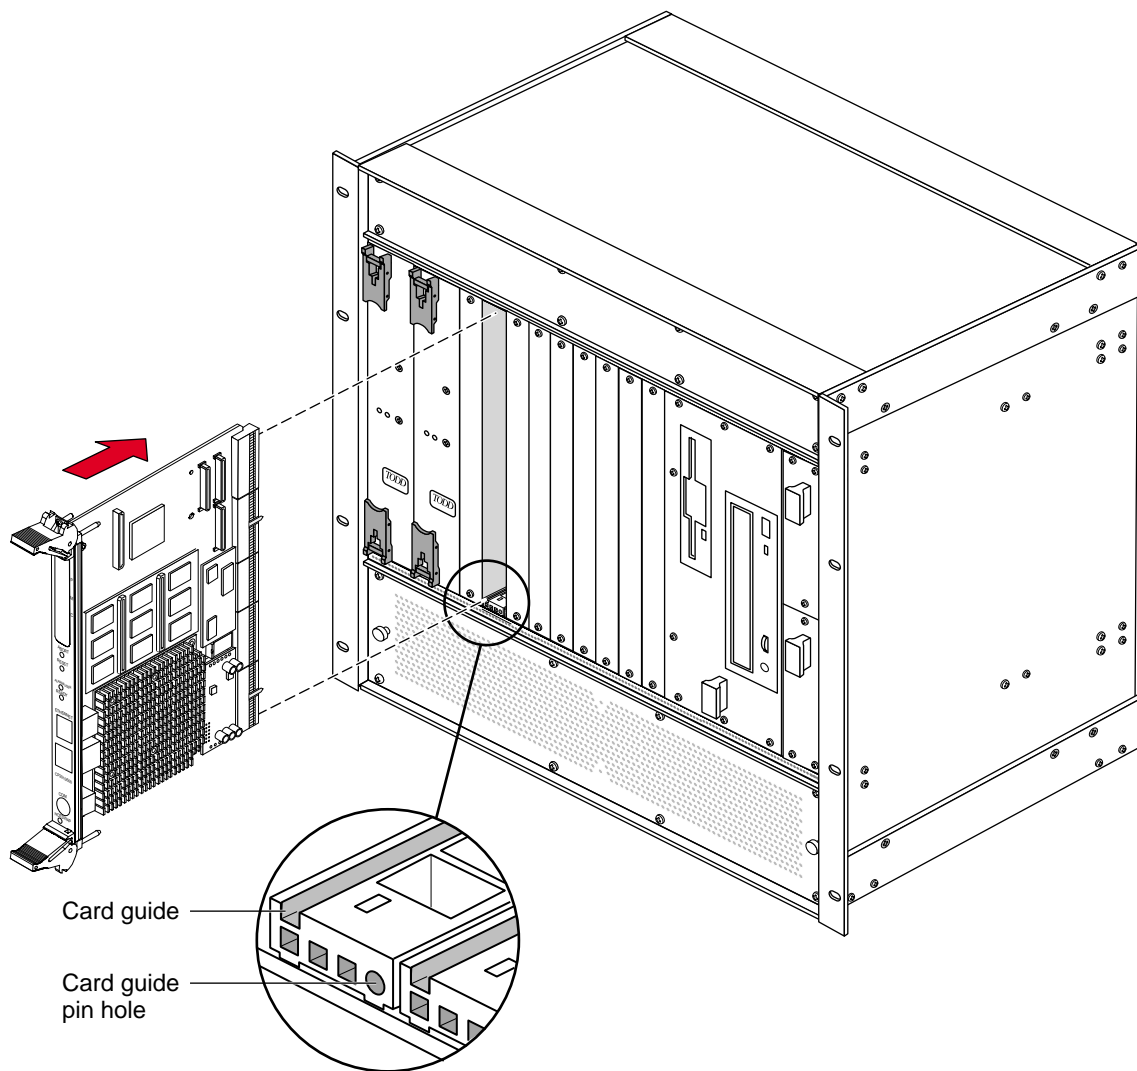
Netra CP2140 Board Installation (Close-up View)
